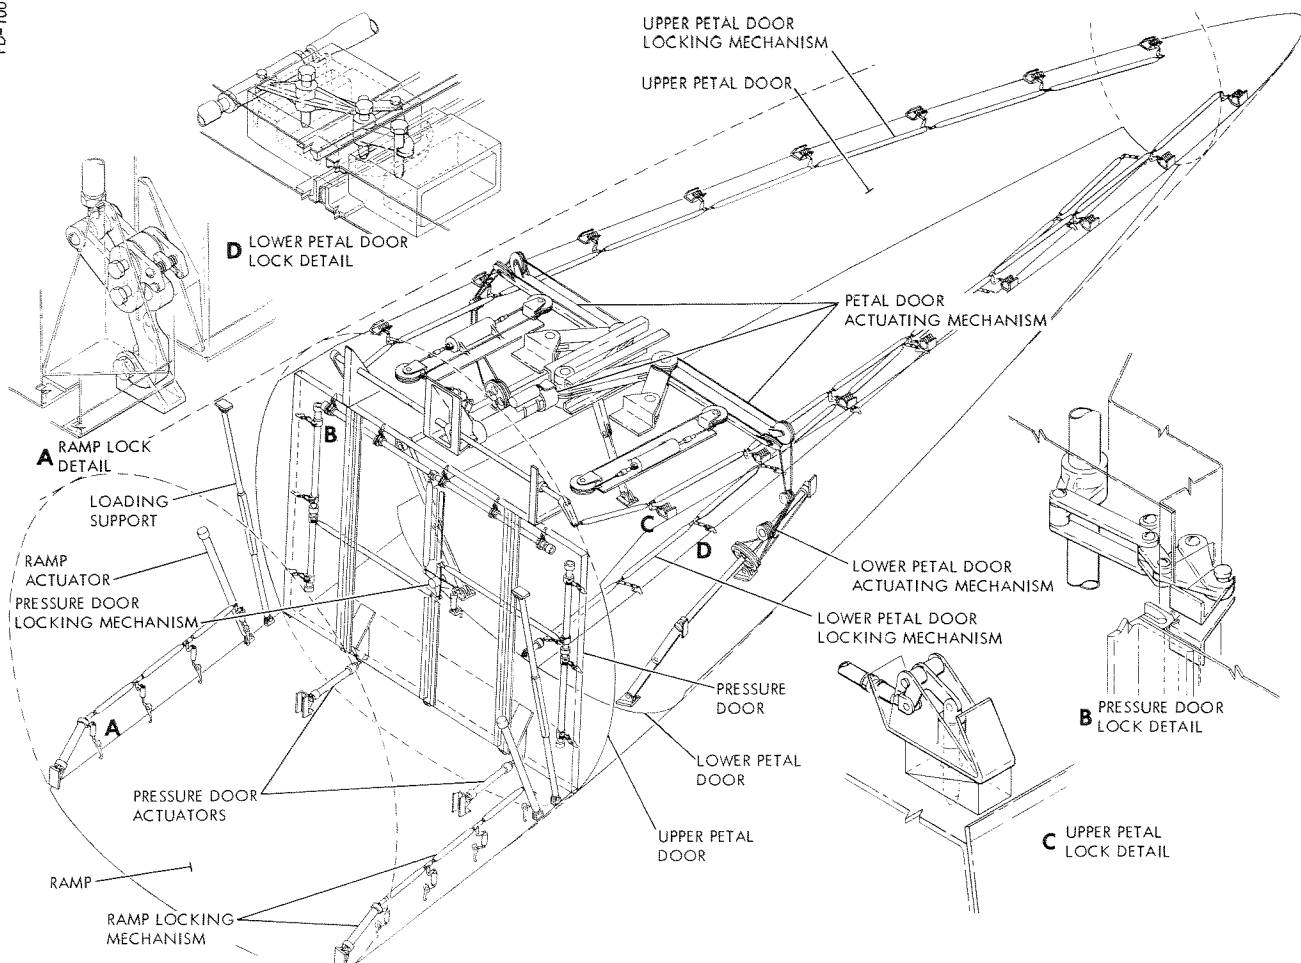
AFT CARGO DOOR ACTUATING MECHANISM.
